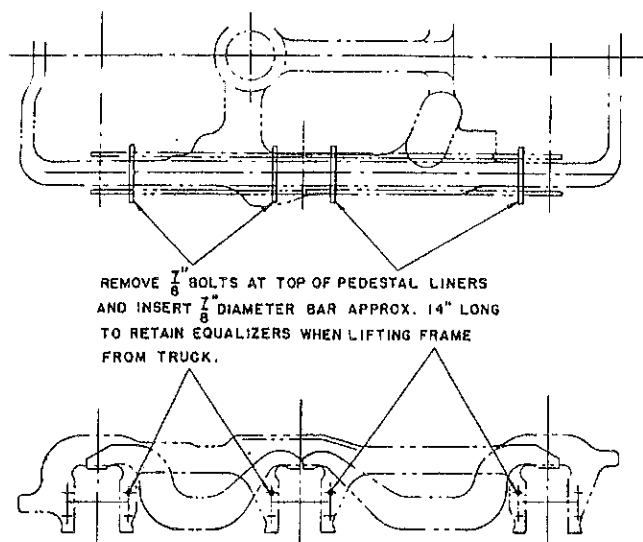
DISASSEMBLY-THREE MOTOR TRUCK
